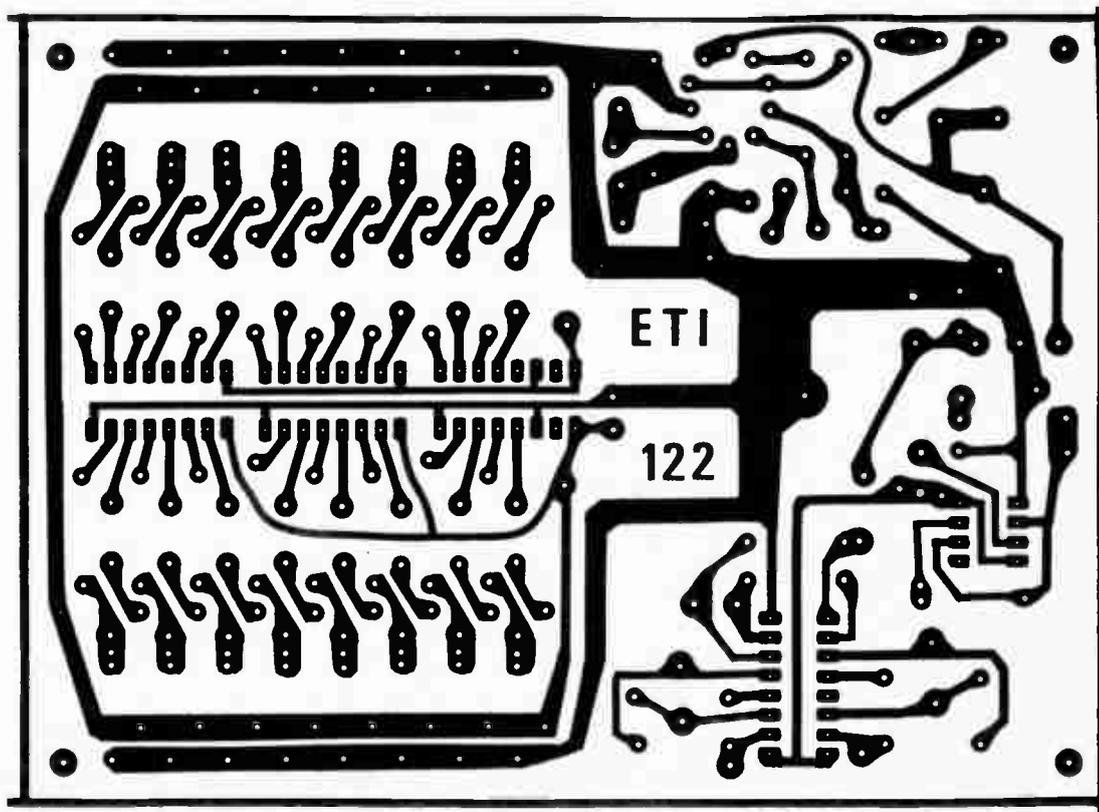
Printed circuit-board artwork. Full size 142 x 104 mm.
